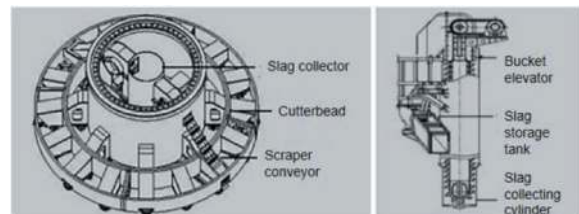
(a) Slag scraping by scraper conveyor (b) Slag conveying by bucket elevator.
